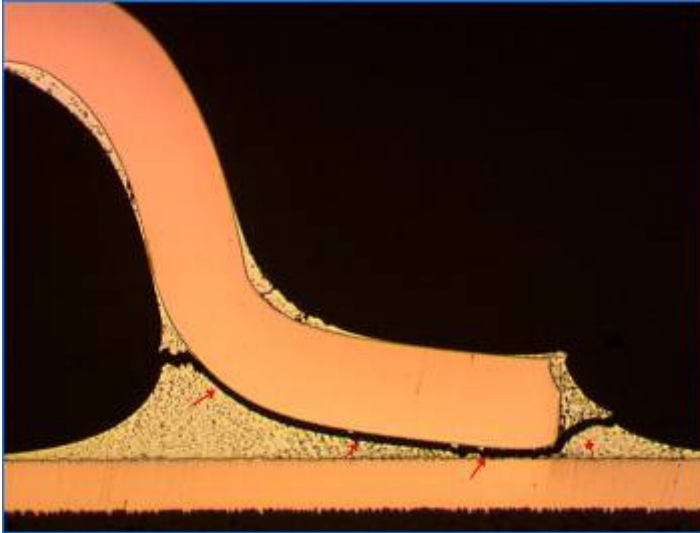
cross section, SN67, U31, right lead solder crack, 100x
